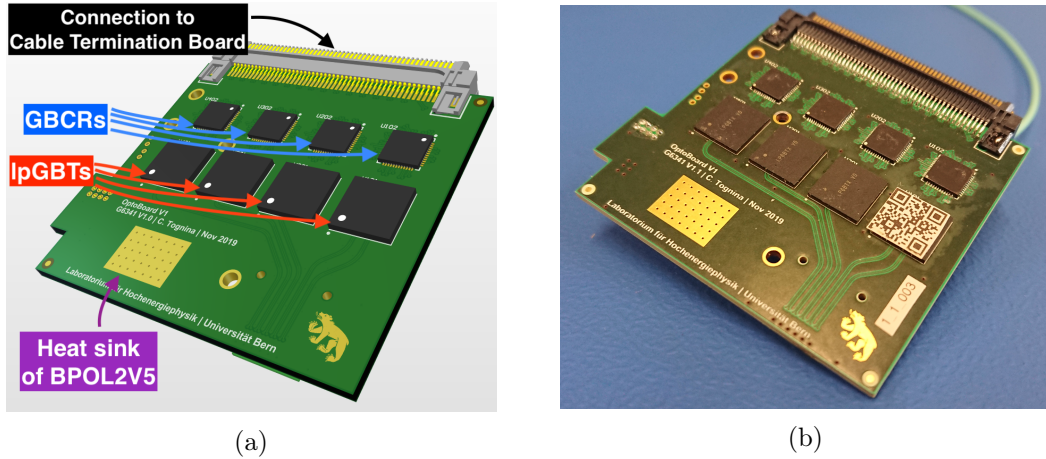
CAD view (a) and picture (b) of the back side of the Optoboard V1 prototype, indicating the relevant visible parts.
